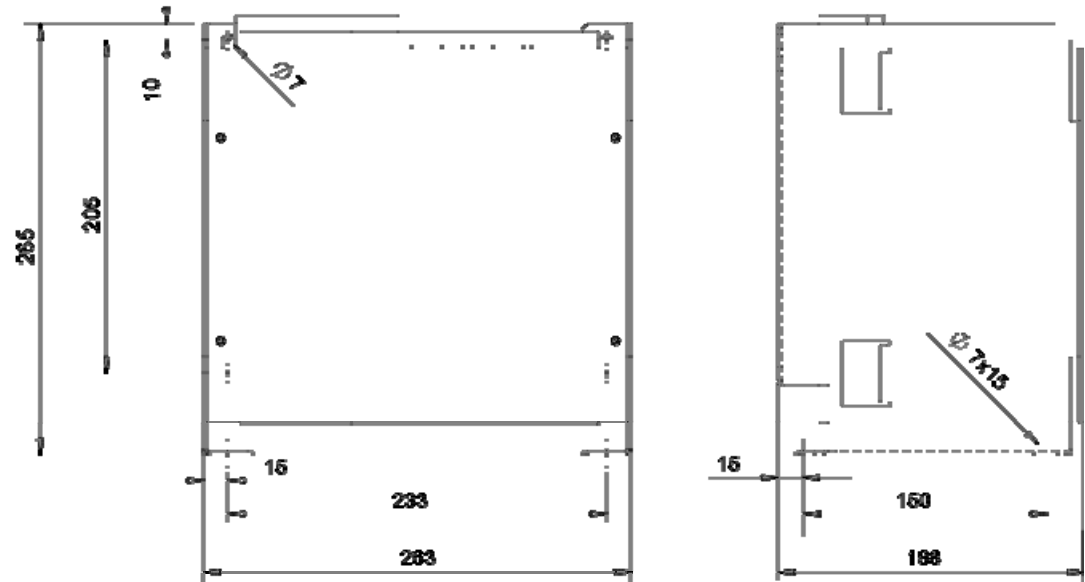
Dimension drawing of the voltage peak limiter, type 1
